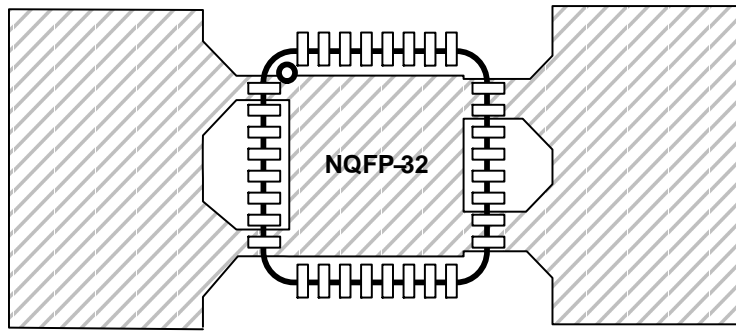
Example of NQFP-32 PCB Ground Plane Layout in Top View (Preferred Layout at Top and Bottom)
